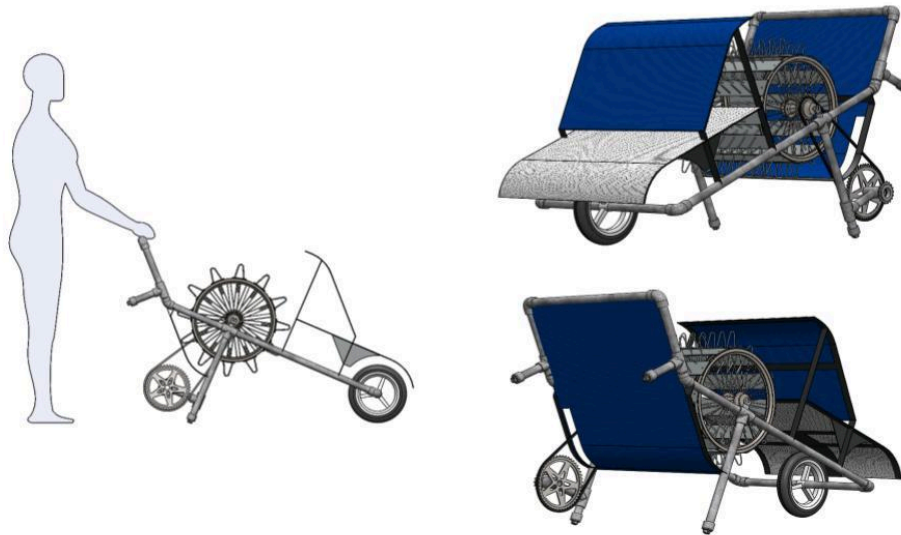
Two frame options of threaded GI pipe with connectors and MS L-angle weldment
